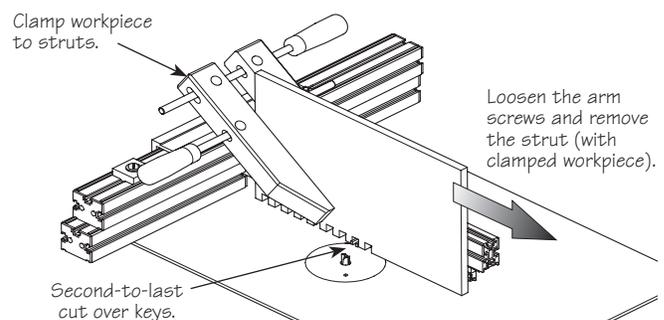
Workpiece clamped to struts with second-to-last cut over keys.
